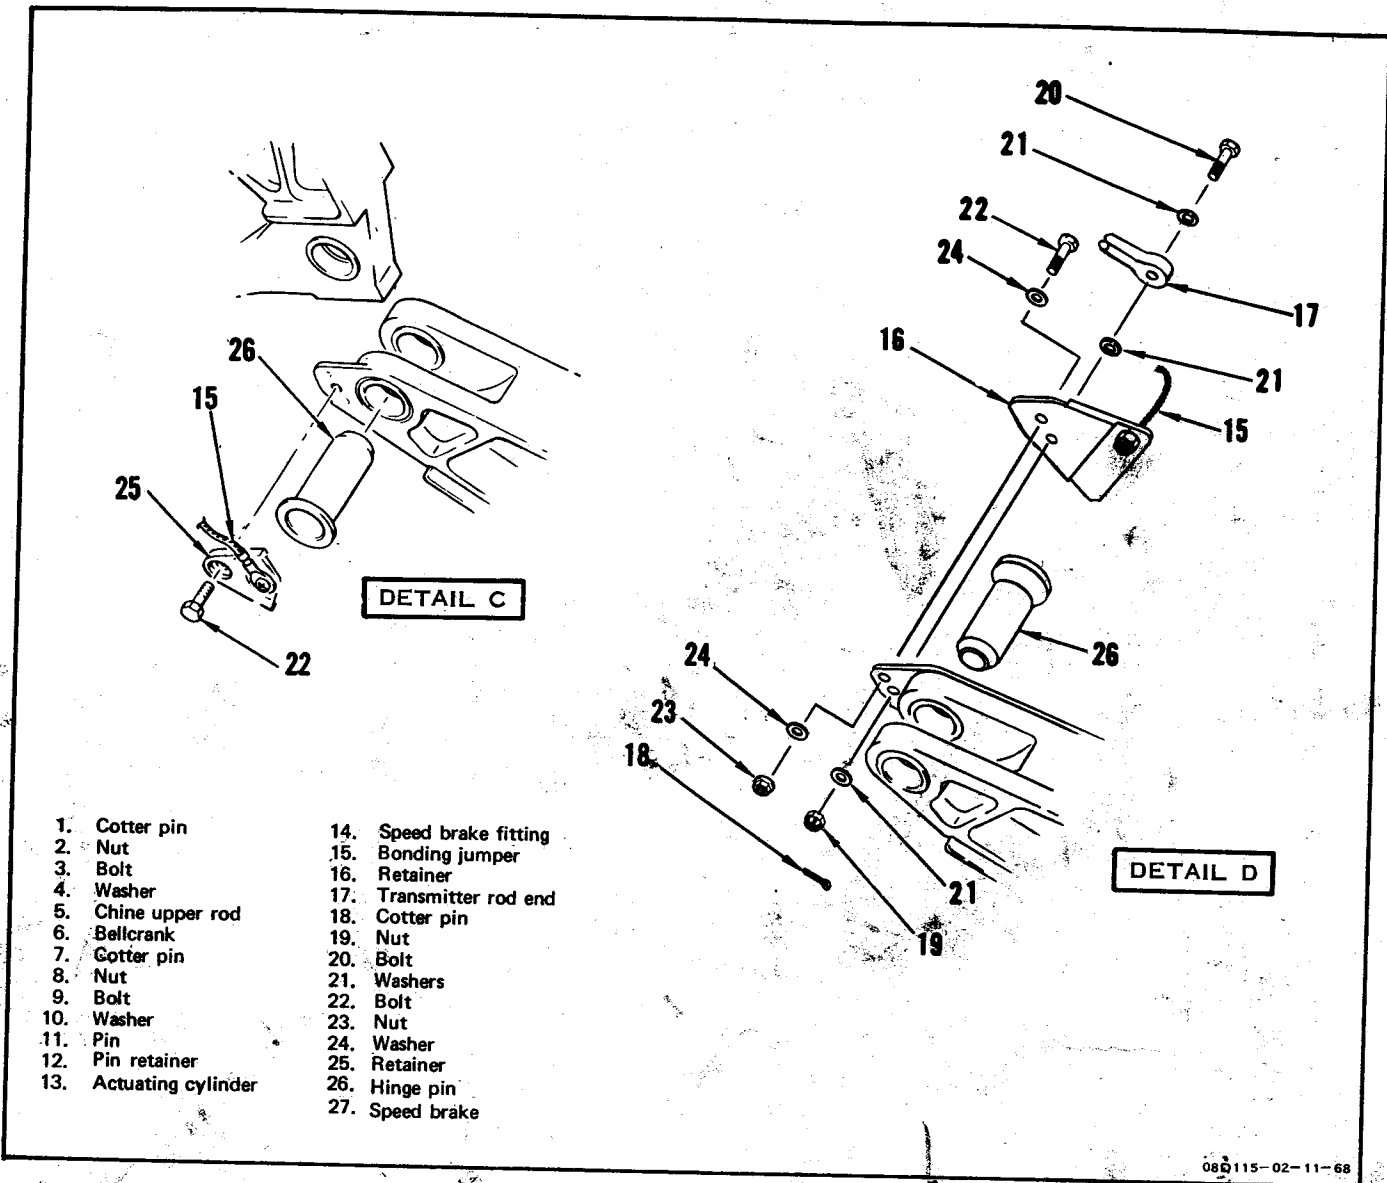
Speed Brake Removal and Installation (Sheet 1)
